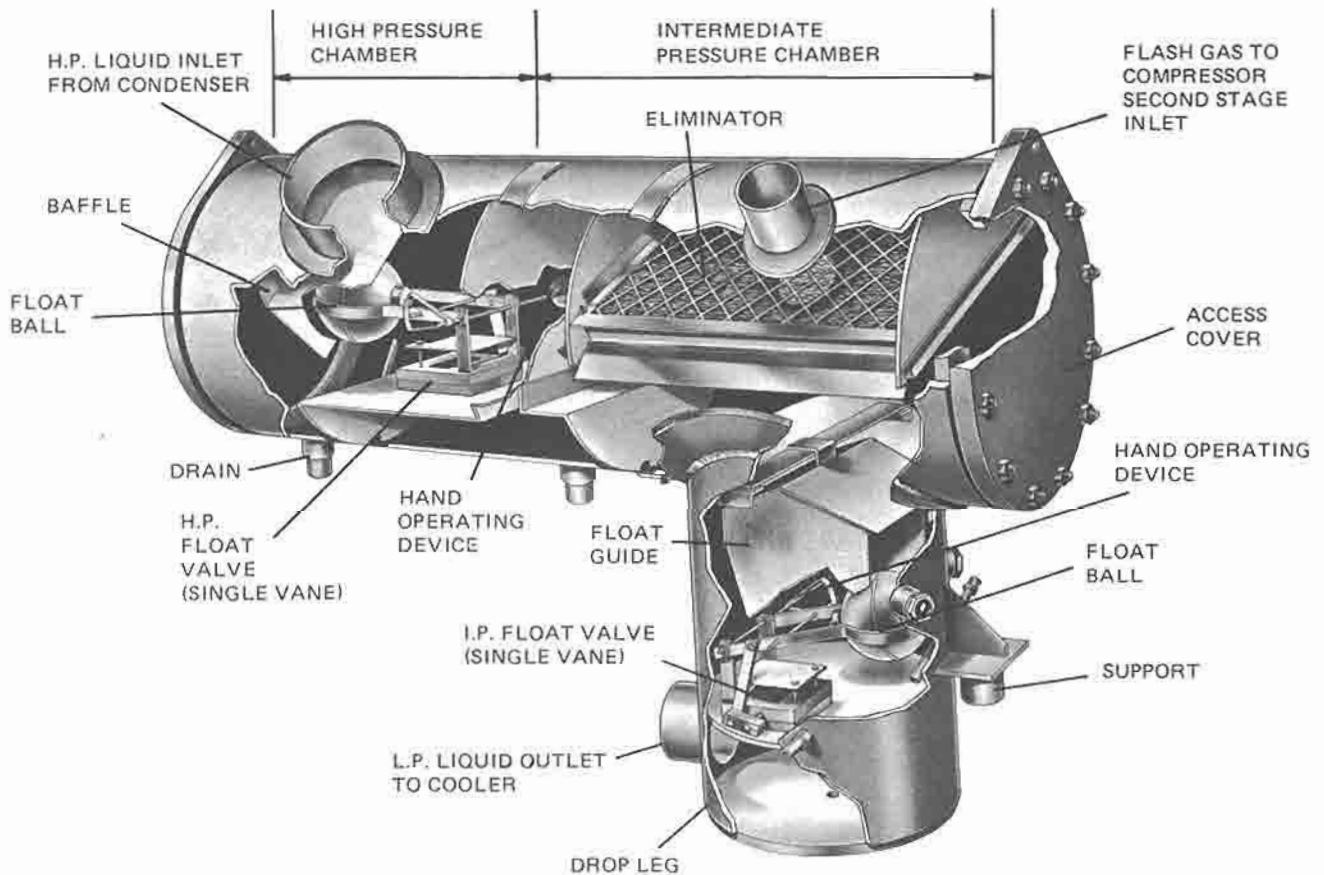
CUT-AWAY VIEW, SINGLE STAGE INTERCOOLER (36" DIA' & SMALLER)
